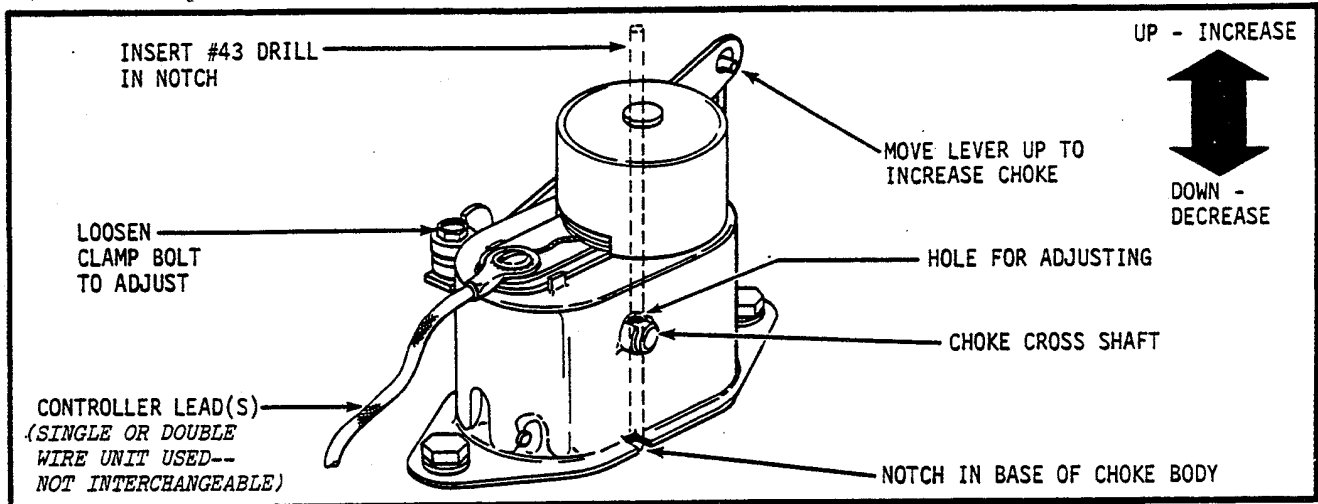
MANIFOLD MOUNTED TYPE AUTOMATIC CHOKE
